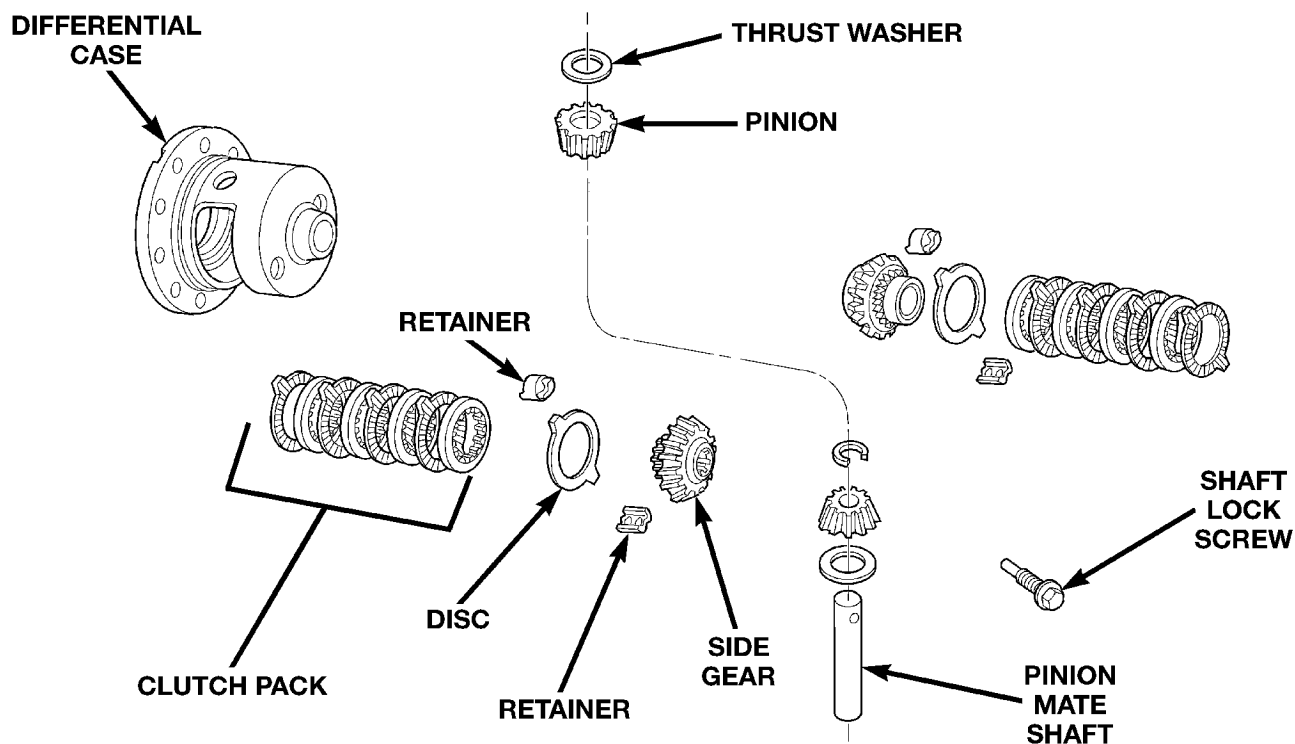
Pinion Gear Mate Shaft Lock Screw
